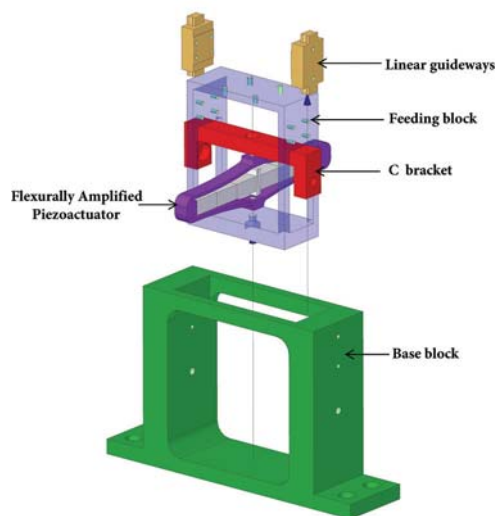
Exploded view of Piezo actuator based workpiece feeding system
